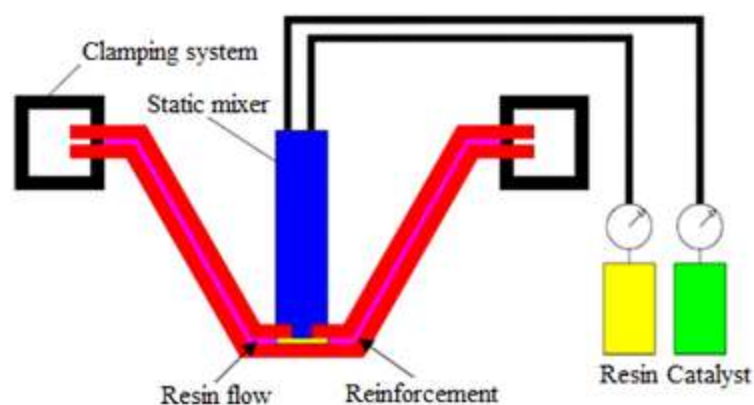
Injection molding process RTM, after [Ipe.05].
